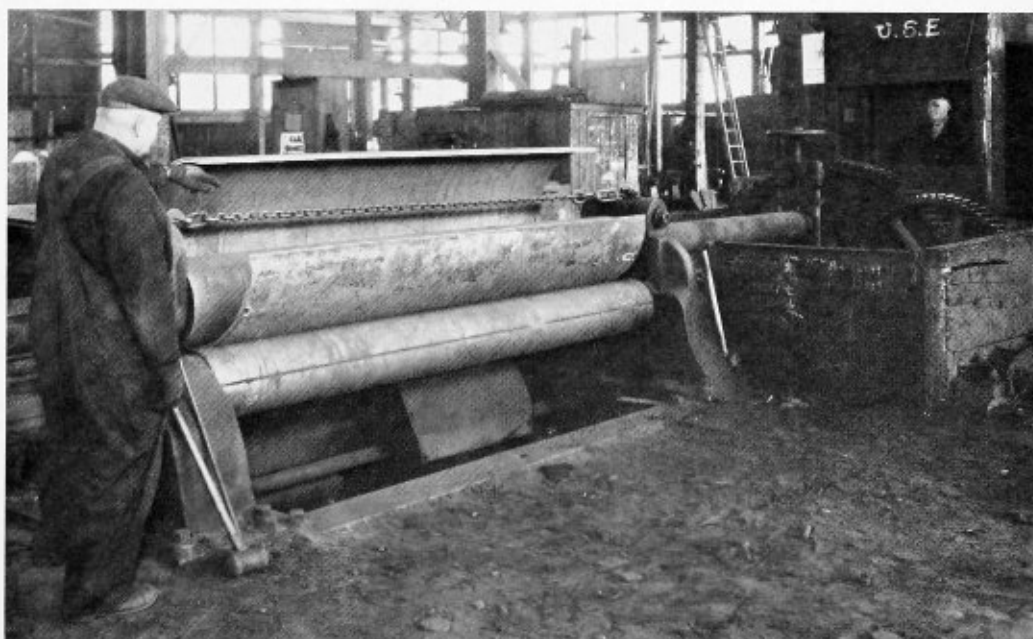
Wrought iron plates $\frac{3}{4}$ inch thick being formed in a roll bender for fabrication into large O.D. pipe
